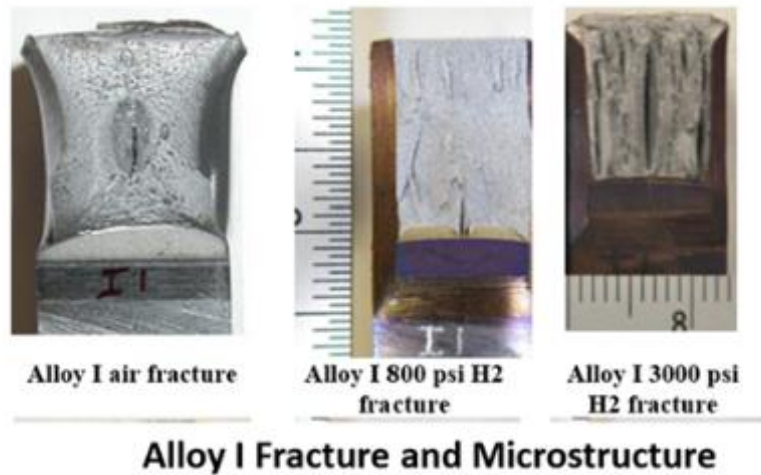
Examples of CT specimen fracture surface separations from E1820 fracture toughness tests
